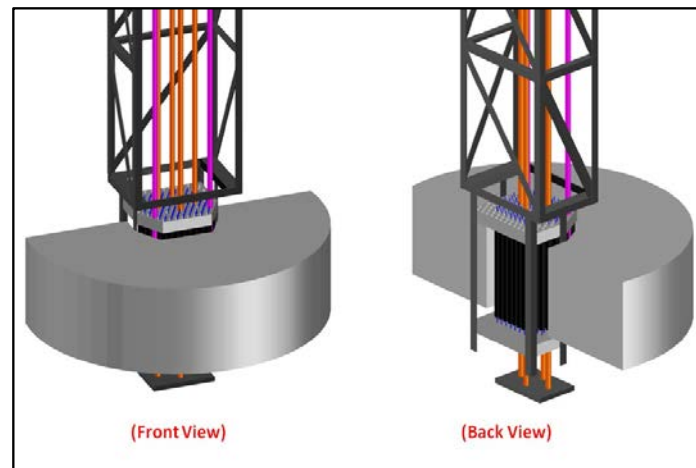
AutoCAD drawing of the new core–moderator assembly and tower design (courtesy of K. Ünlü, PSBR).
